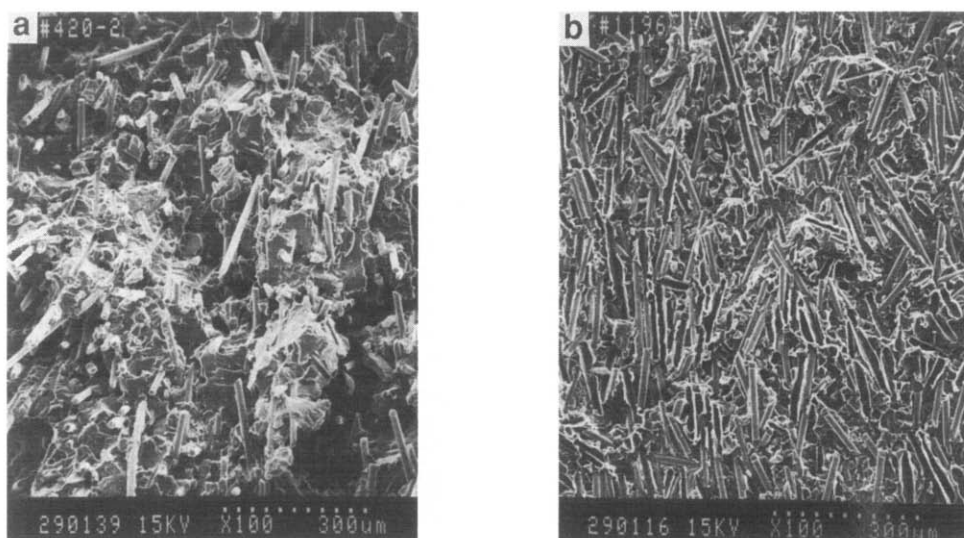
SEM micrographs (original magnification 100 \times) of the fracture surfaces of two 30-GF-PBT specimens: (a) unwelded specimen; (b) specimen welded at 120 Hz at a weld pressure of 3.45 MPa
